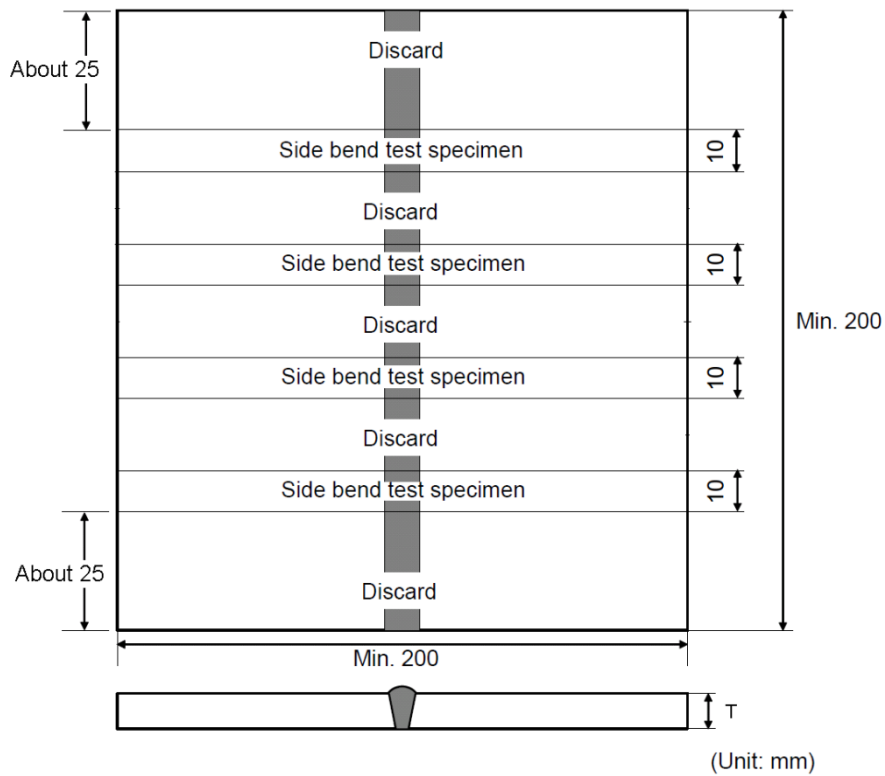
Dimensions and types of test assembly for butt welds (T ≥ 12mm)
